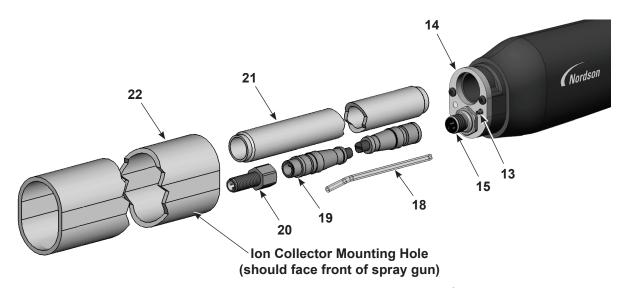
Tube-Mount Gun Disassembly 2 of 5
